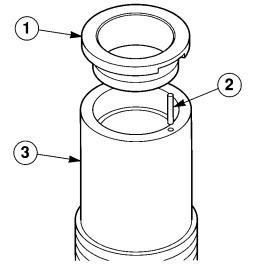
Replacing thrust sleeve. (1) Thrust Sleeve, (2) Pin, (3) Spindle.
